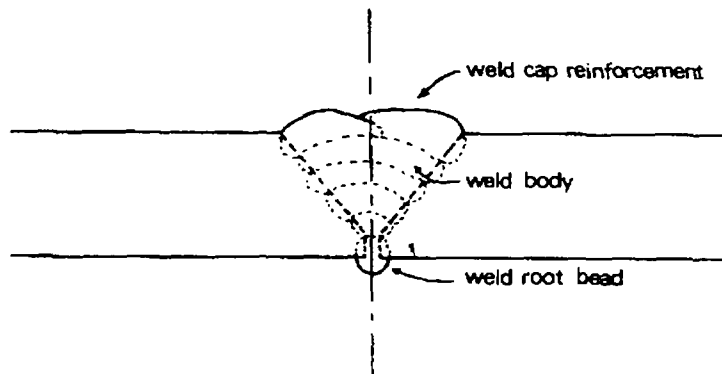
b : Original preparation of weld and number of passes made to complete the weld.
